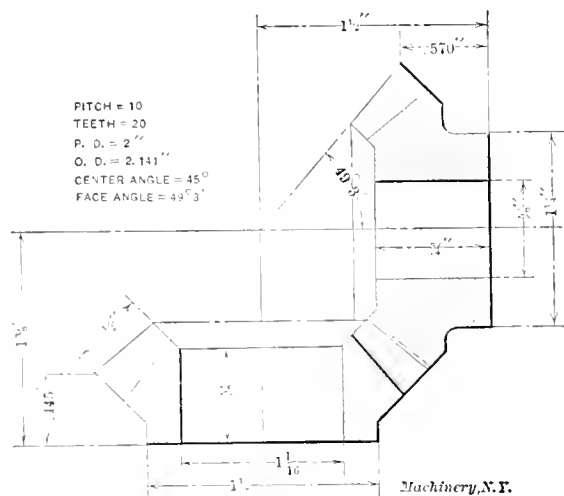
Miter Gears for which Gages in Figs. 2 and 3 were made.
